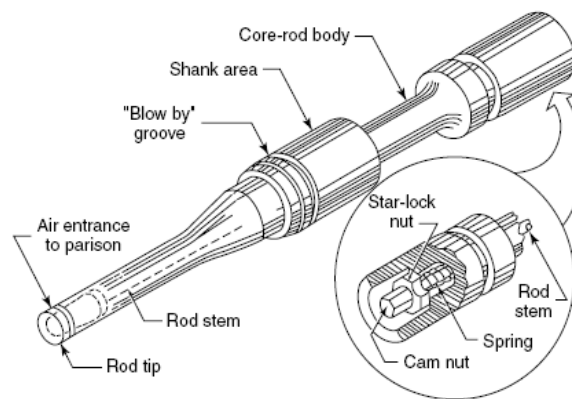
Typical bottom-blow core rod and its principal elements. The core-rod tip mechanism that closes the air passage during the parison-injection cycle is shown enlarged at right (17). Courtesy of Plastic Engineering.
